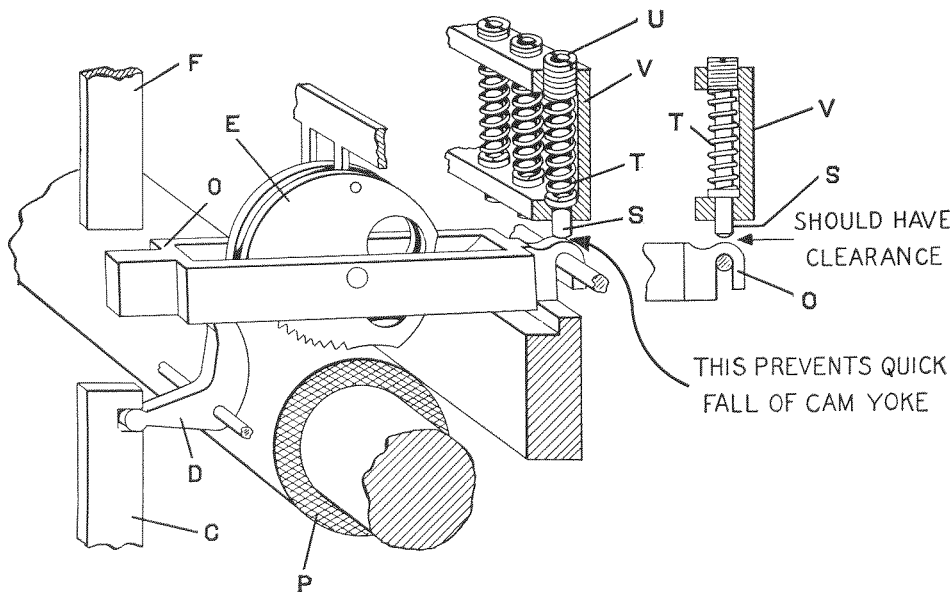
Arrangement used on the later keyboards, and is a further detail of keyboard parts. *C*, keyboard bar; *D*, trigger; *E*, keyboard cam; *O*, keyboard cam yoke; *P*, cam roll; *S*, plunger operated by the spring *T*; *U*, screw bushing for adjusting the tension of the spring *T*; *V*, frame in which the plungers and springs are mounted.
